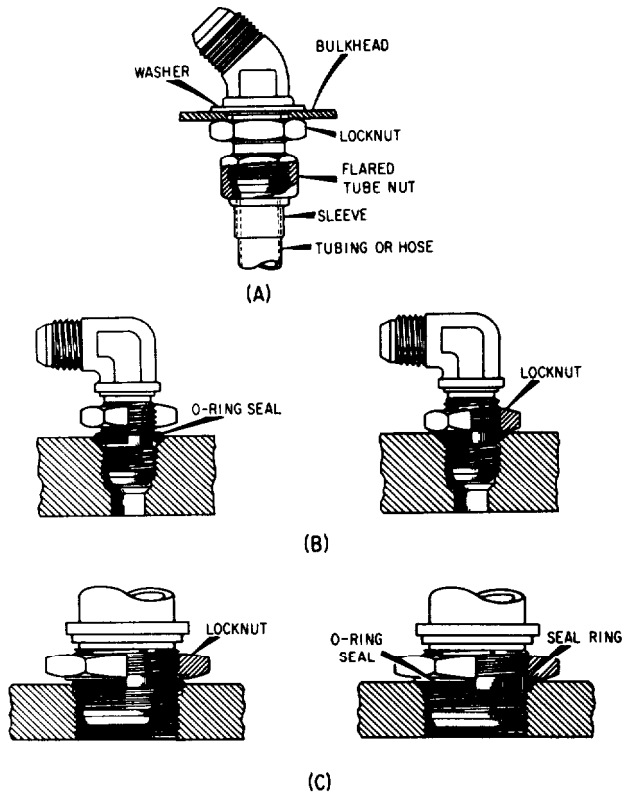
Fuel line fittings. (A) bulkhead fitting; (B) universal fitting; (C) universal fitting with O-ring seal and seal ring.
